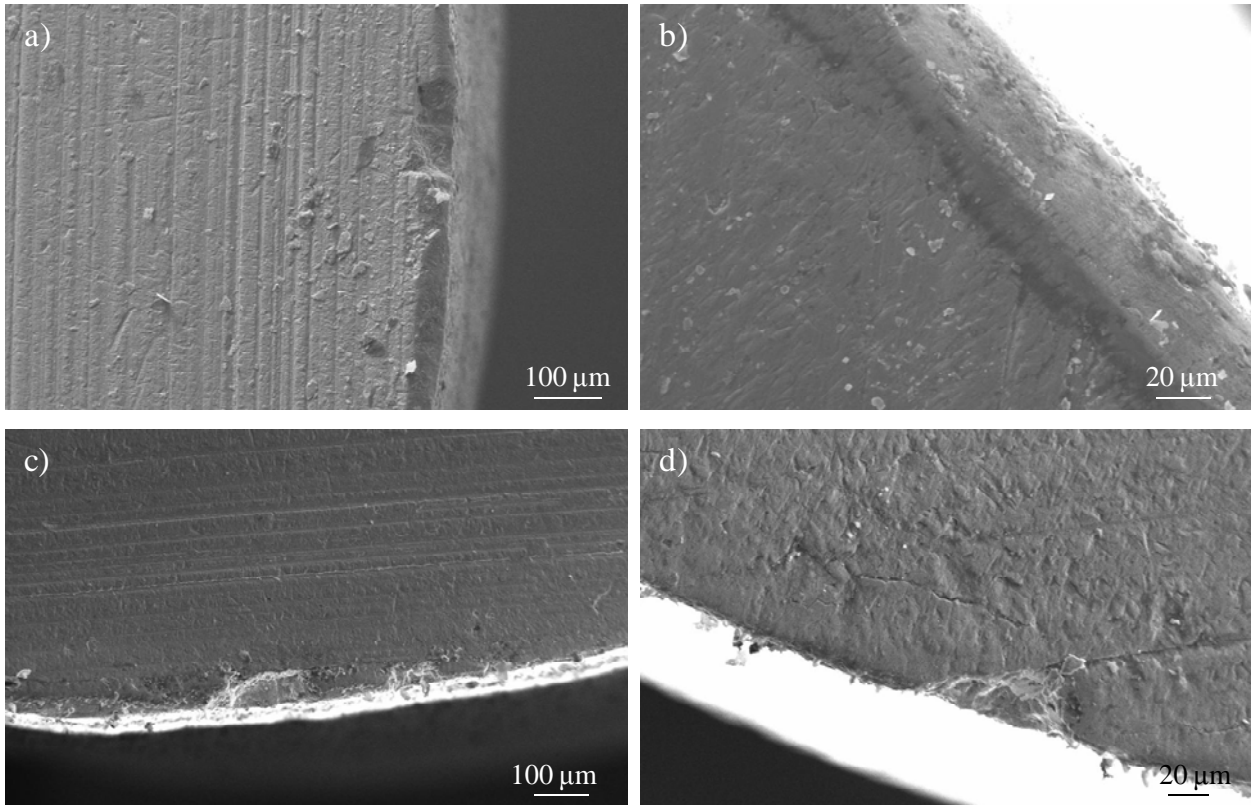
Fractography of the 1.2379A punches with 100 μm radius: a) and b) after 17000 strokes; c) and d) after 26000 strokes
